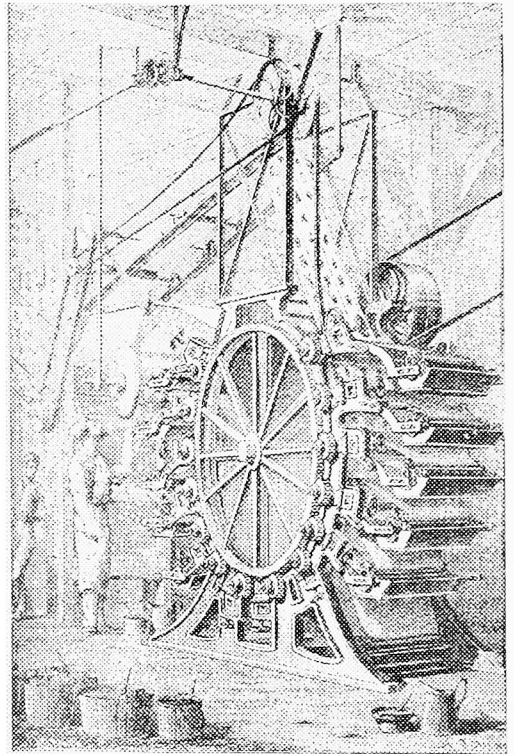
1779 WALLPAPER PRINTING MACHINE
